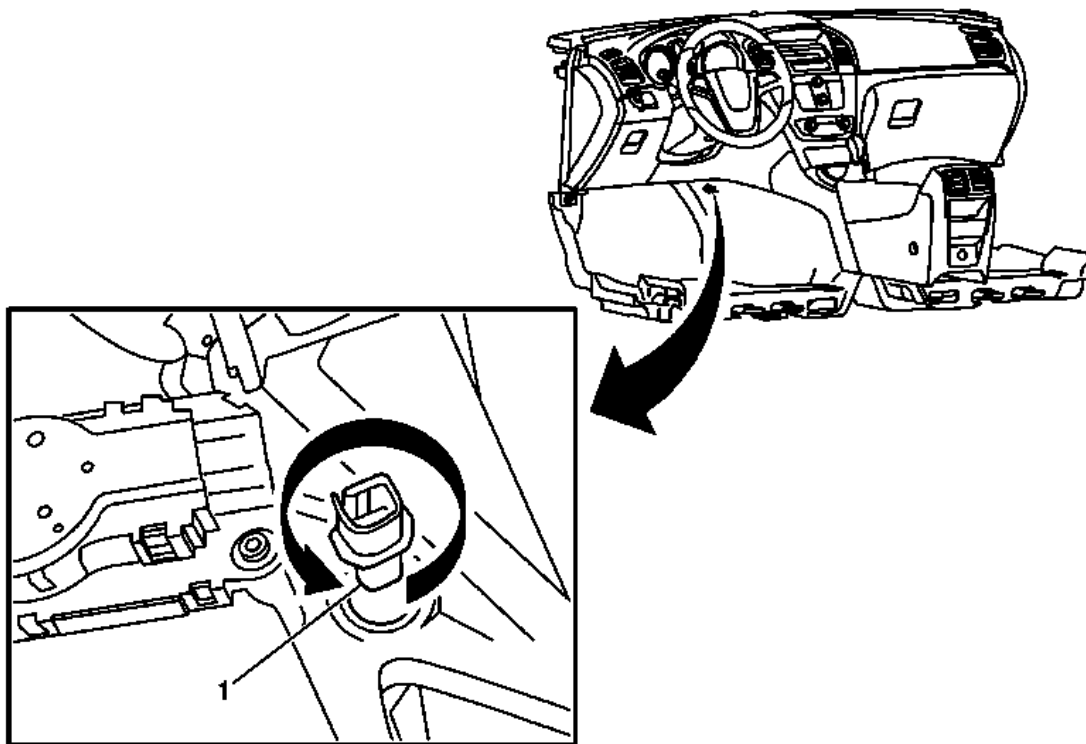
Duct Air Temperature Sensor - Lower Left Side (Left Hand Drive)
